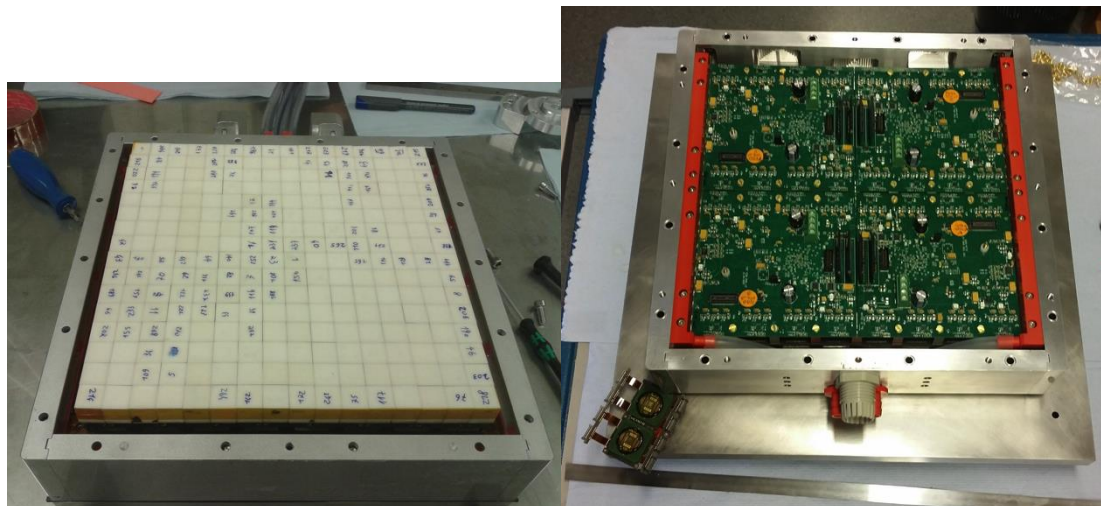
a) top view of the open external plate. Visible are the crystal matrices assembled on the electronics. b) bottom view of the open external plate. Visible is the electronic PCB board and in red the sidewalls of the cooling system.
